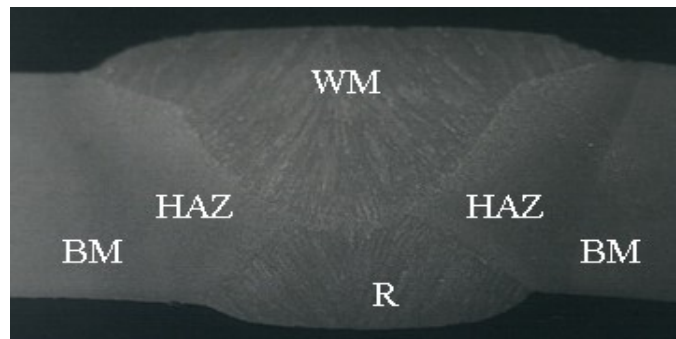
Submerged Arc API 5L-X65 Weld Joint. BM = Base Metal. HAZ = Heat Affected Zone. WM = Weld Metal. R = Root. Welding using V butt joint with roots.
